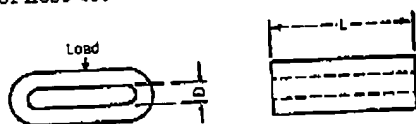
DEFORMED SPECIMEN OF VACUUM BRAKE HOSE
